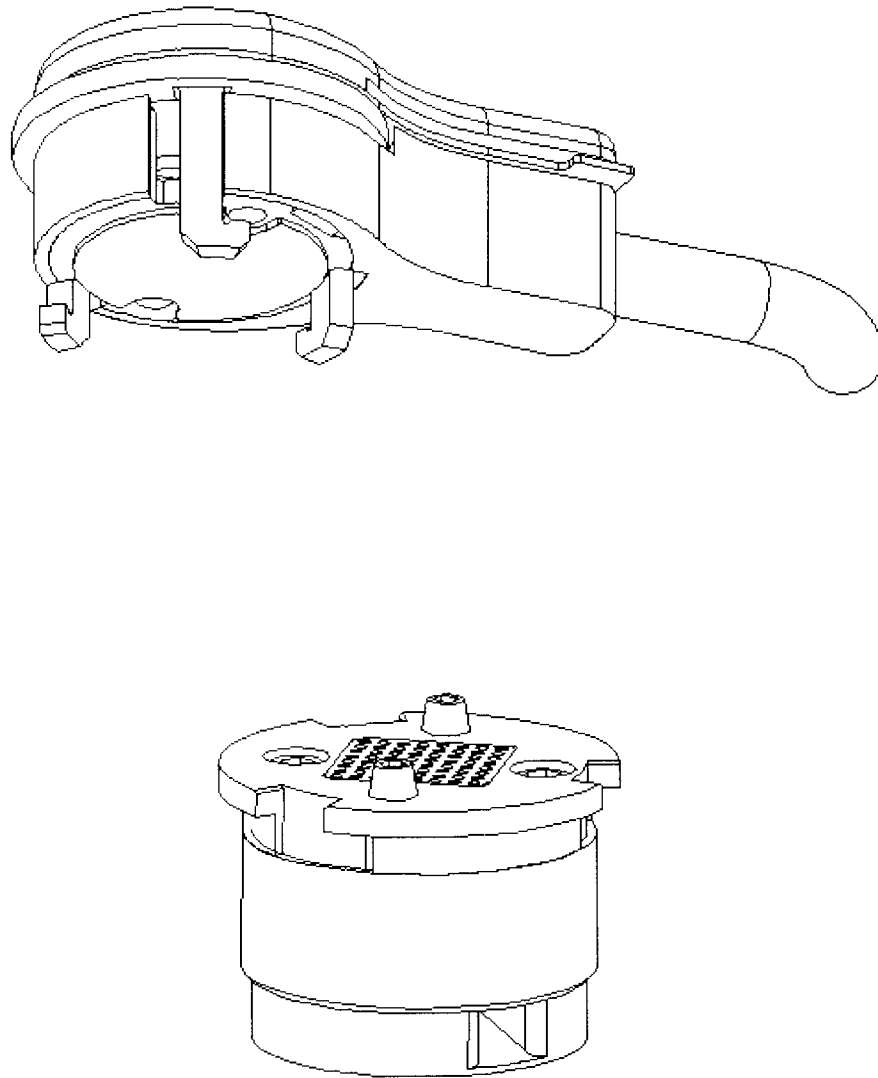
The lower or implantable mechanism and the upper (external) mechanism shown separately. Note the alignment features and the notched flange on the lower section and the claws on the upper section. The pin grid array (PGA) is clearly shown on the lower section, but the mating contacts of the flex circuit are not shown on the upper assembly.
